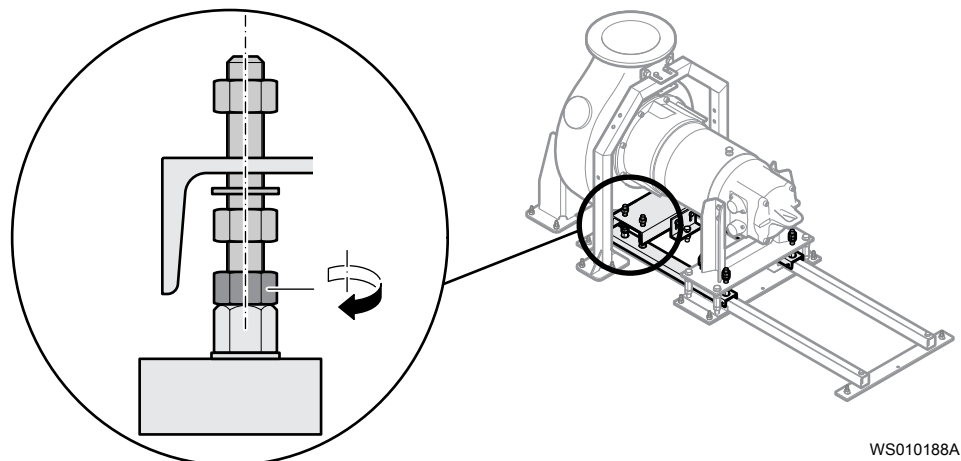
Tightening bottom nut at the support plate near the hydraulic end
